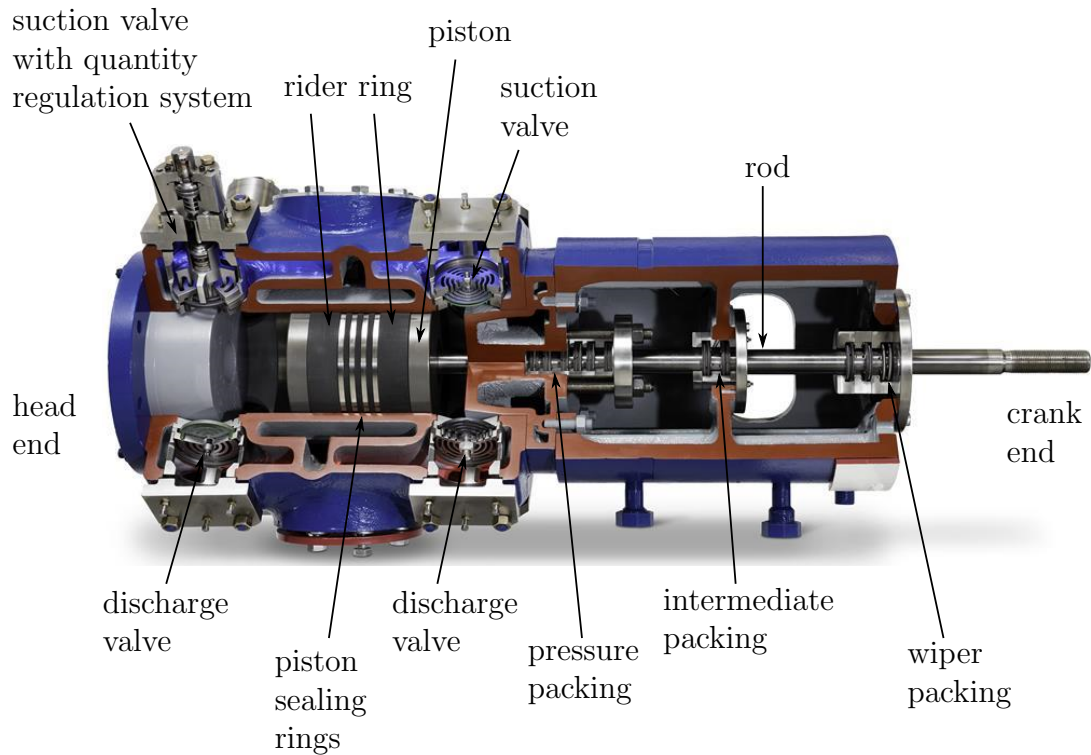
Cut of a compressor including the piston rings, the rider rings, the pressure packing, the intermediate packing and the wiper packing. All packings consist of multiple rings. The photo taken is from [63].
